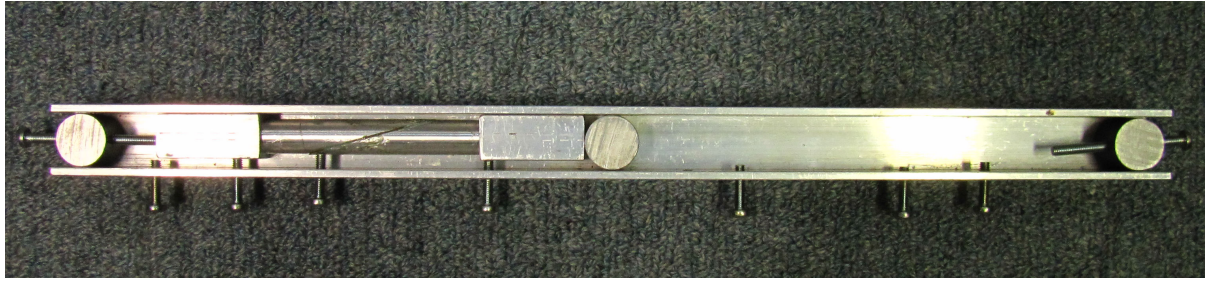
Fixture to align and maintain contact of scarf joints during curing
